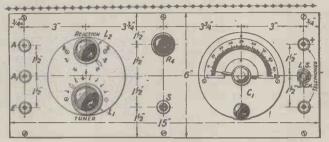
Panel drilling dimensions may be obtained from this diagram.
